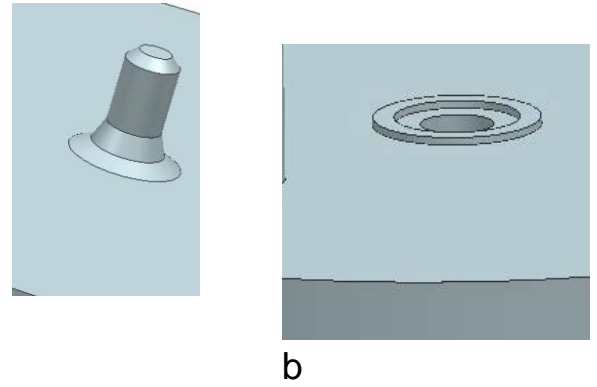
Segments. Crimp Three-Dimensional Models for:
